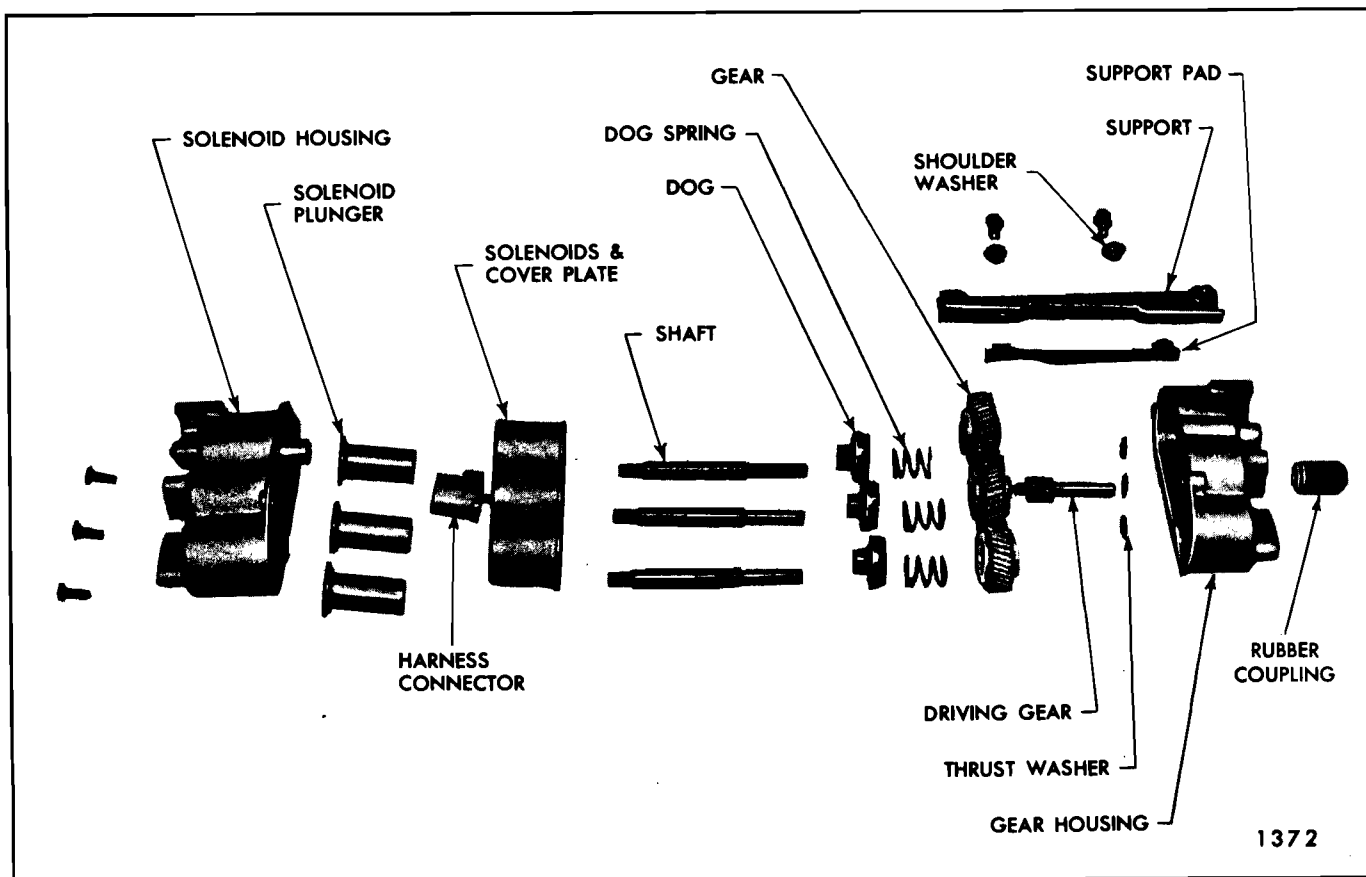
Six-way Seat Adjuster Transmission - "B & C" Full Width Seat
